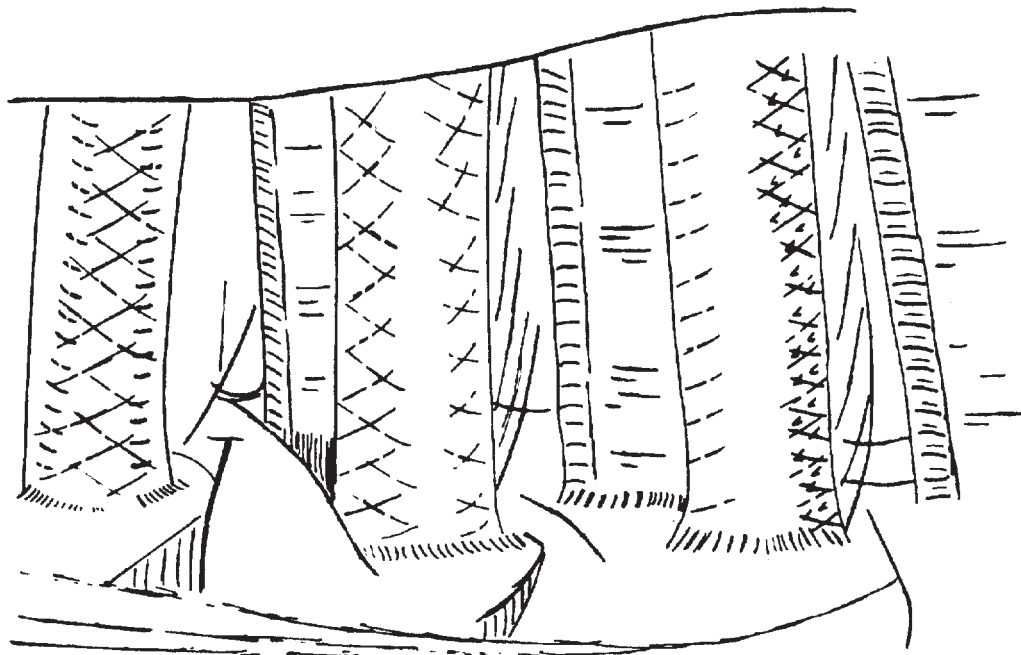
Drawing of Borescope Photograph of First Stage High Pressure Nozzle Diaphragm on LM 2500 Engine.
